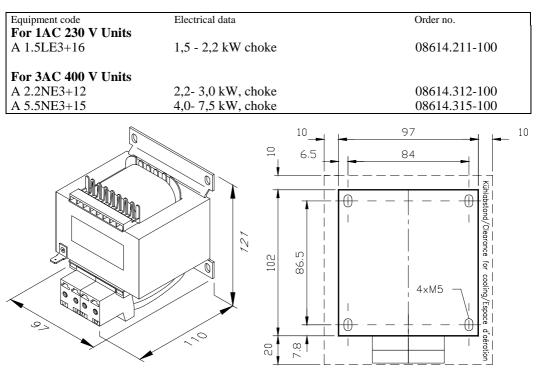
Outline drawings and mounting A 1.5LE3+16
